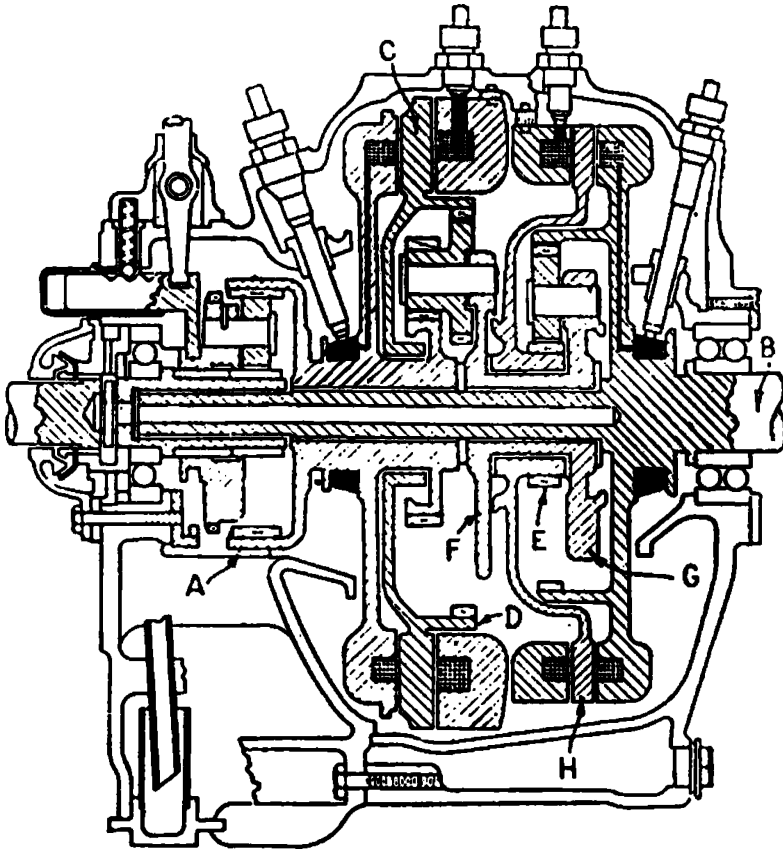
Semi-automatic gearbox produced by Cotal from 1934. The different elements of epicyclic gears are braked by electromagnets; the reverse is engaged manually.
